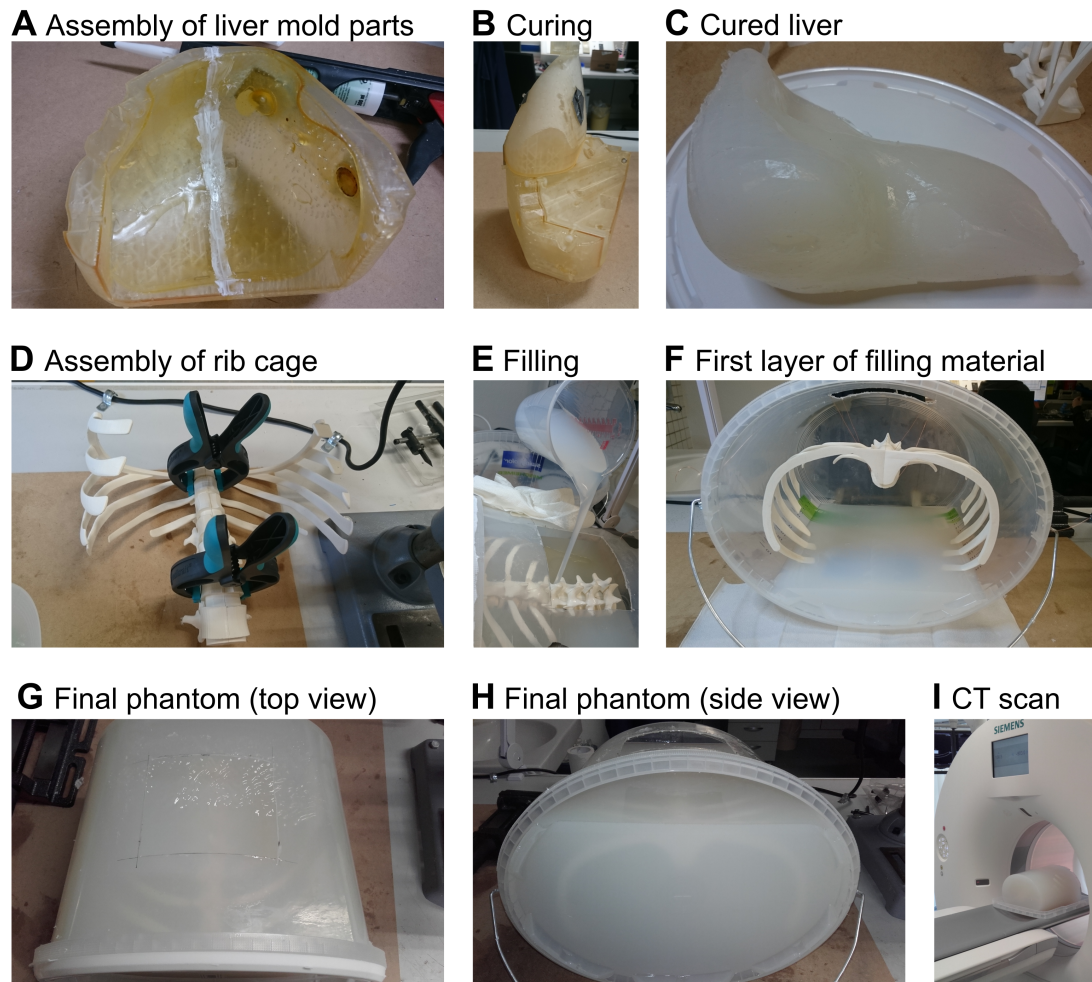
Photographs of manufacturing process of the prostate phantom A: Assembly and sealing of parts of the 3D-printed mold for the liver. B: Whole liver mold during curing. C: After removal of the liver mold. D: Assembly of the two halves of the 3D-printed rib cage. E: Filling of liquid silicone into the container. F: Placement of rib cage in the outer container and curing of first layer of filling material. G: Top view and H: side view of the final form of the phantom. I: Placement of the phantom corresponding to a "head first supine" position in a CT scanner.
